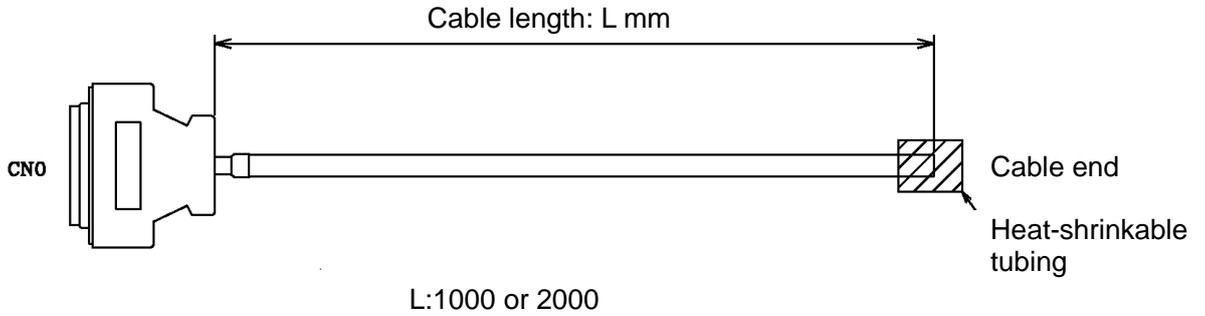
Outline drawing for the hand I/O cable (Option)
